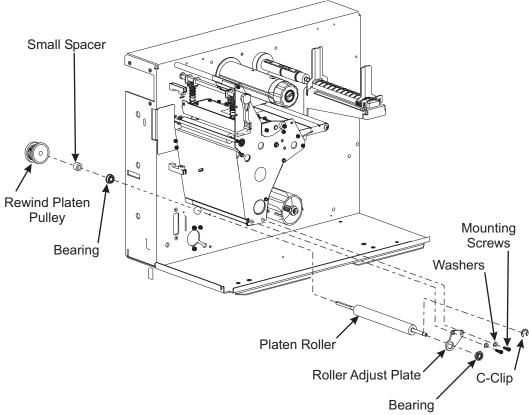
Print Mechanism View with Rewind Platen Roller
